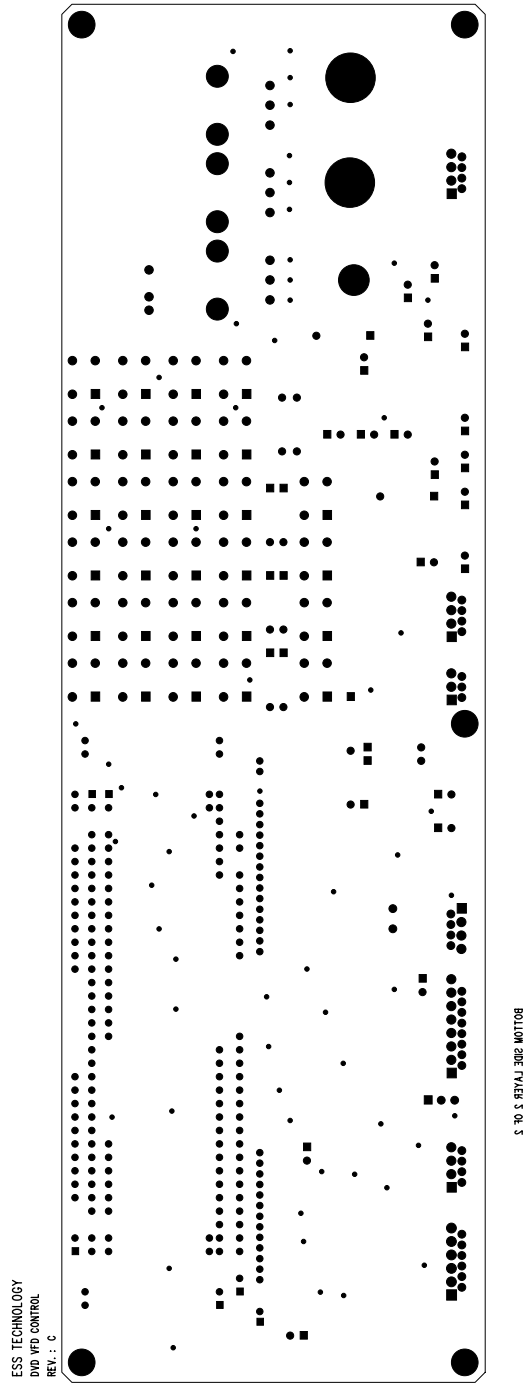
VFD Control Panel Solder Mask Bottom Layer
